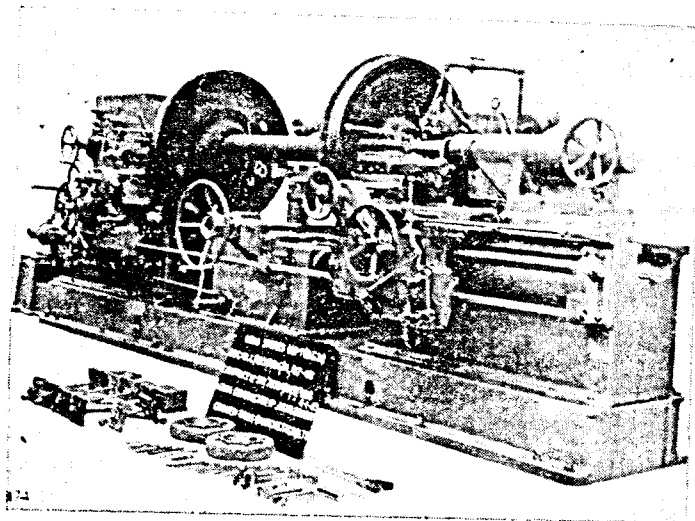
Friction roller Type axle journal returning & Burnishing lathe. (craven make)
